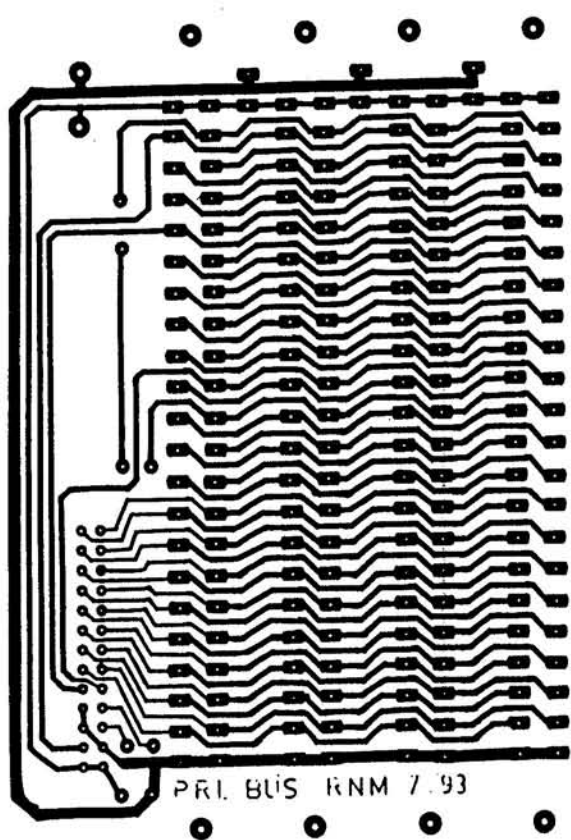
PCB LAYOUT OF SMPS AND BACKPLANE BUS
